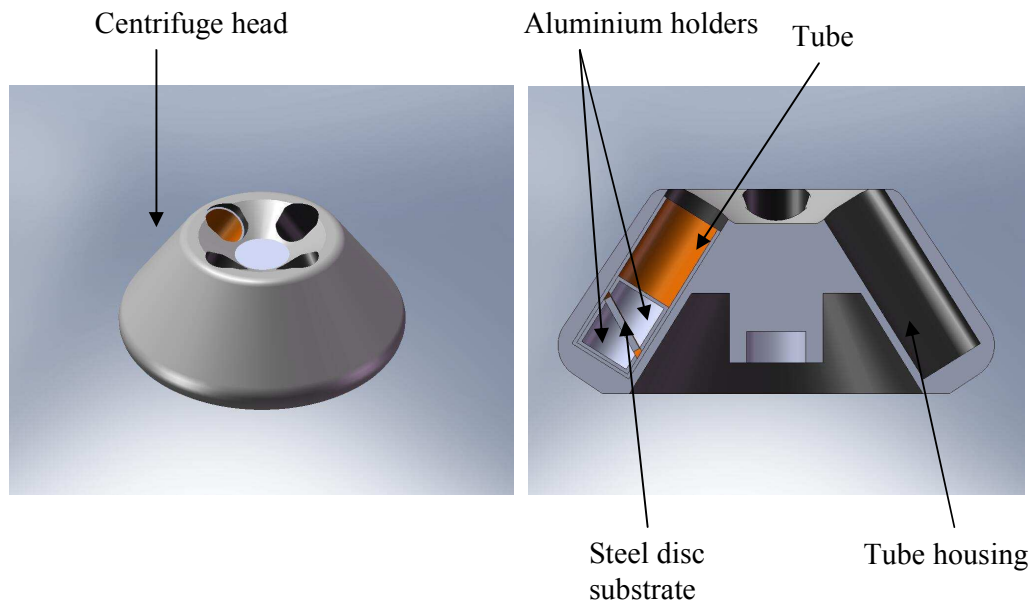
Schematic diagram of substrate housing in centrifuge rotor. (Tube dimensions: H:20 mm, D: 8 mm)
